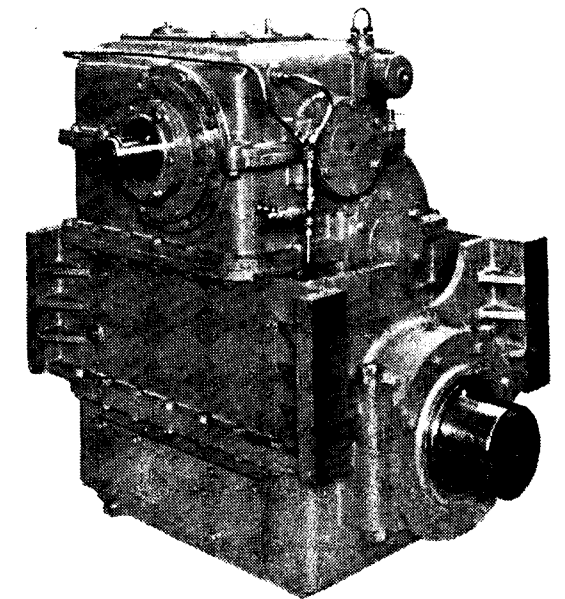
600 h.p. locomotive reversing gear and jack shaft drive (Alfred Wiseman & Co. Ltd., Birmingham)
